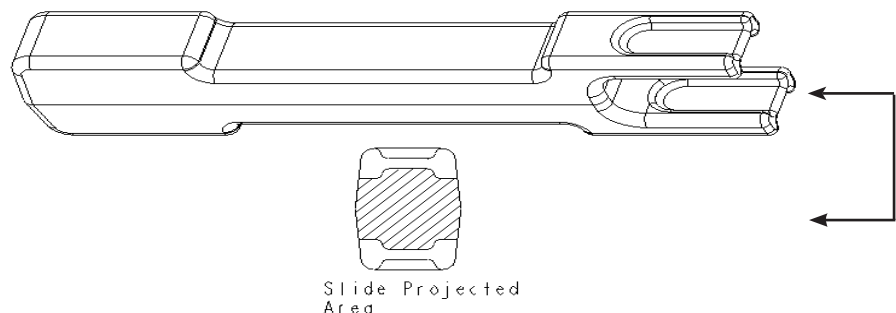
A-1A Proposed component with added features and design modified for cost-effective die casting production, showing orientation in the die casting die and core slide (moving die component) to cast the additional f
